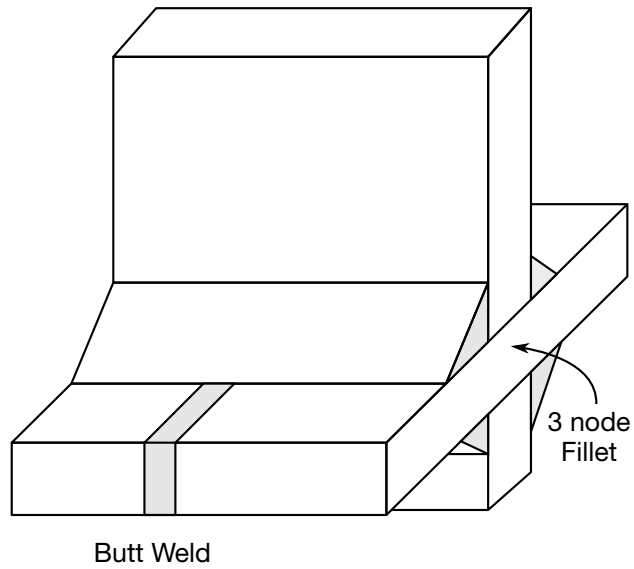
A combined weld is a mixture of fillet and butt welds.
